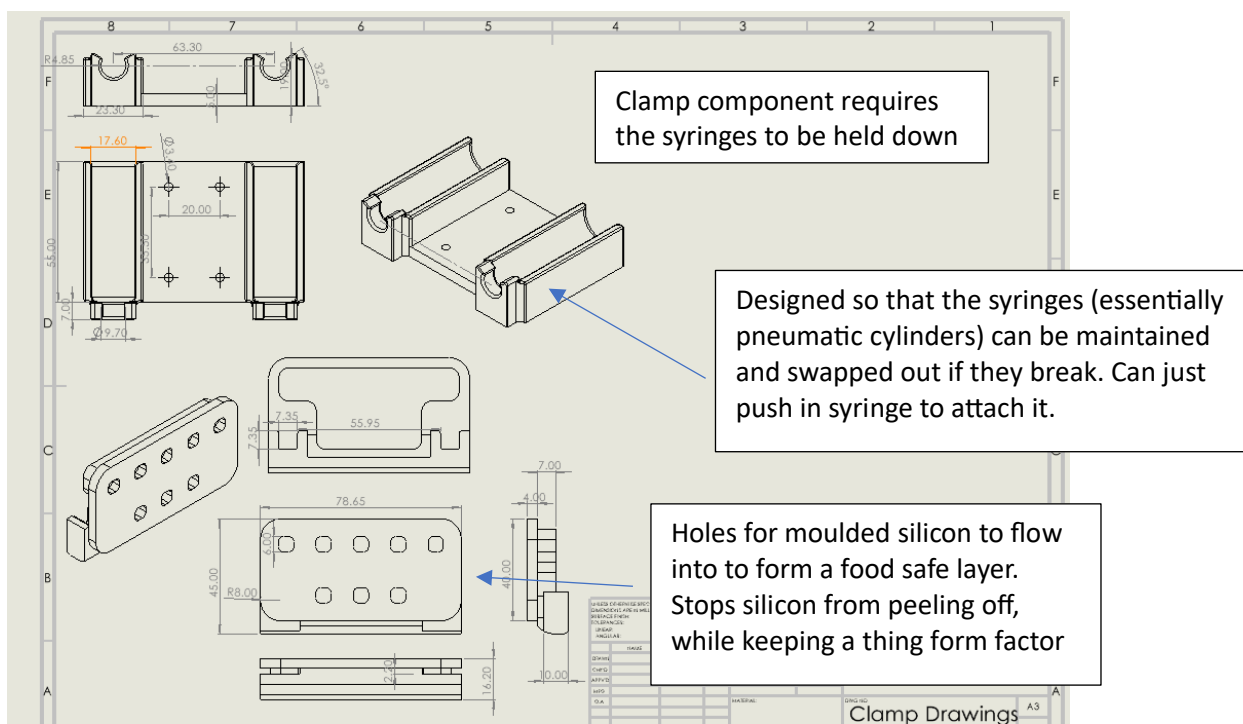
Engineering drawings of clamp components (housing for syringe cylinders)
